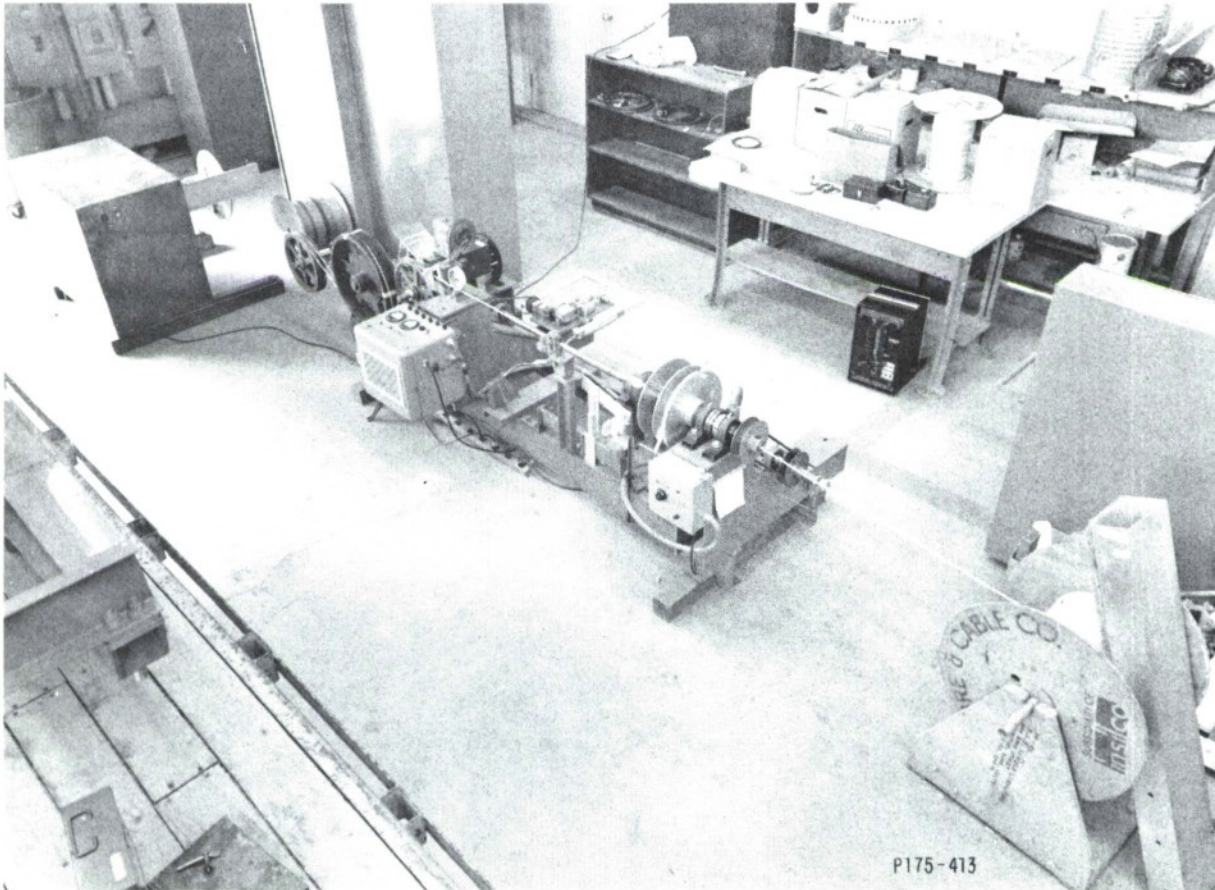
Overall view of taping machine (center) with pay-off reel (right) and take-up (left). The taping head and capstan are shown at the right and left hand ends of the machine.
